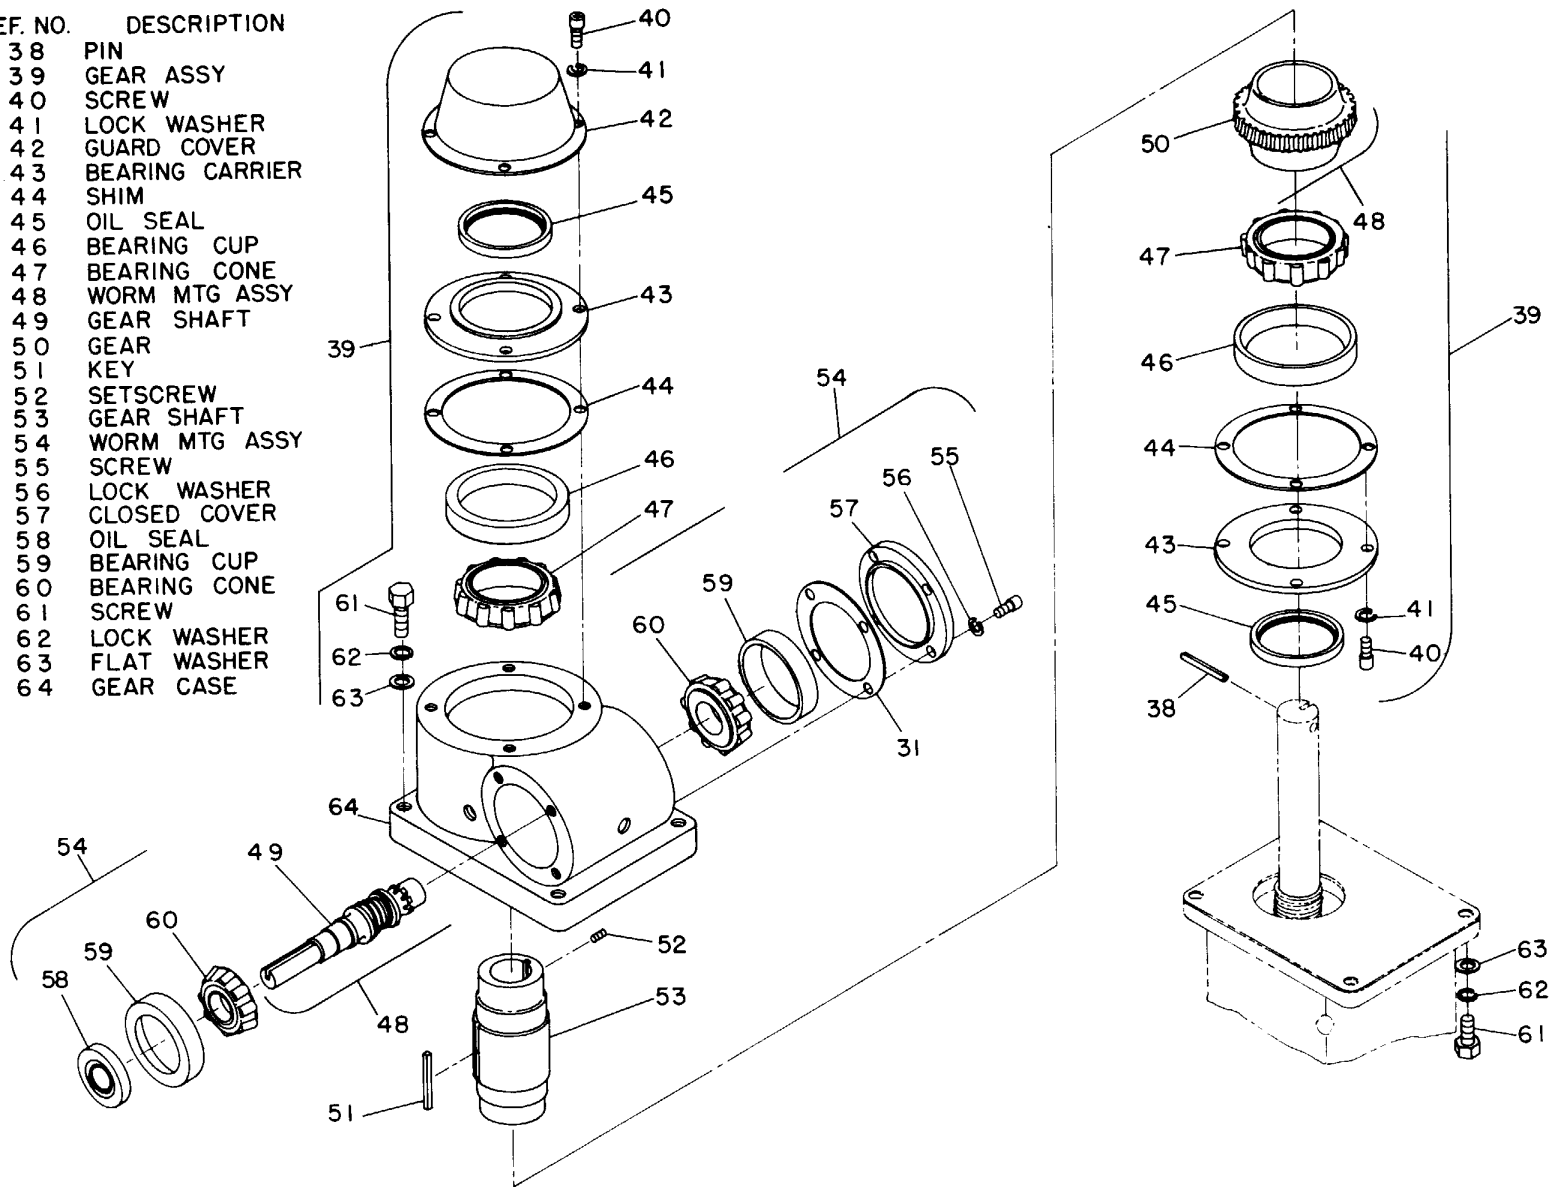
Landing Gear Assembly (Sheet 2 of 3)
